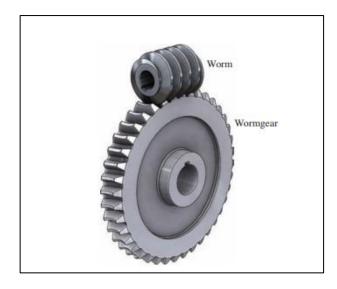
Worm and worm gear with a single threaded worm[1].
